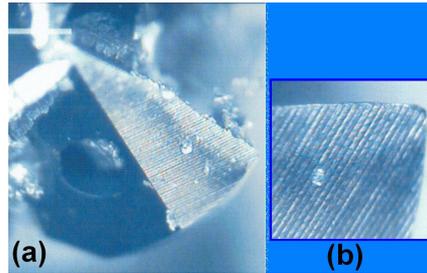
View of the tool after 5,691 thread holes were machined (a) and detail of the tool rake face (b).
